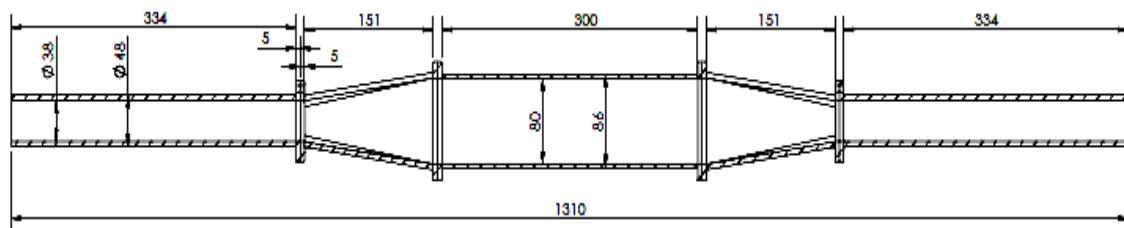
Schematic layout of exhaust heat exchanger (test section 80 × 80 × 300 mm) (A-type).
